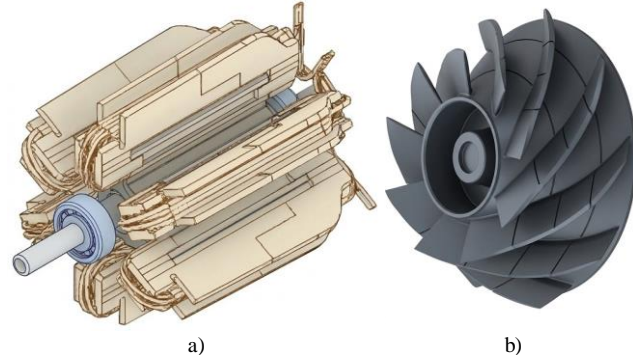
Parts of the proposed VC motor drive: a) Stator and rotor; b) Fan.
